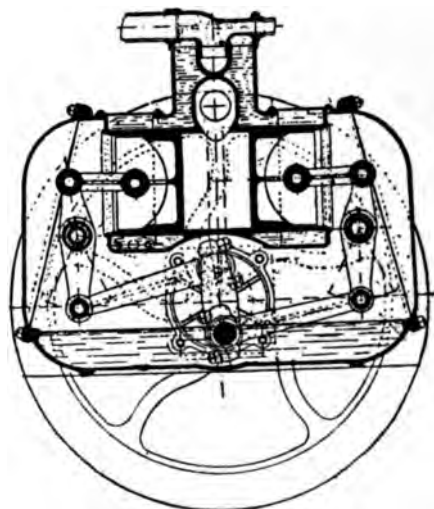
MEES HORIZONTAL, BALANCED MOTOR, WITH CENTRAL COMBUSTION CHAMBER BETWEEN THE PISTONS.
